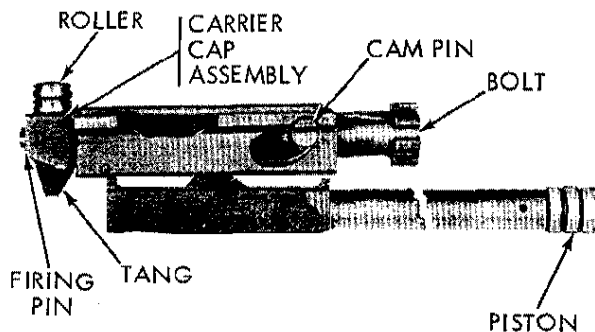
CARRIER, PISTON AND BOLT ASSEMBLY
